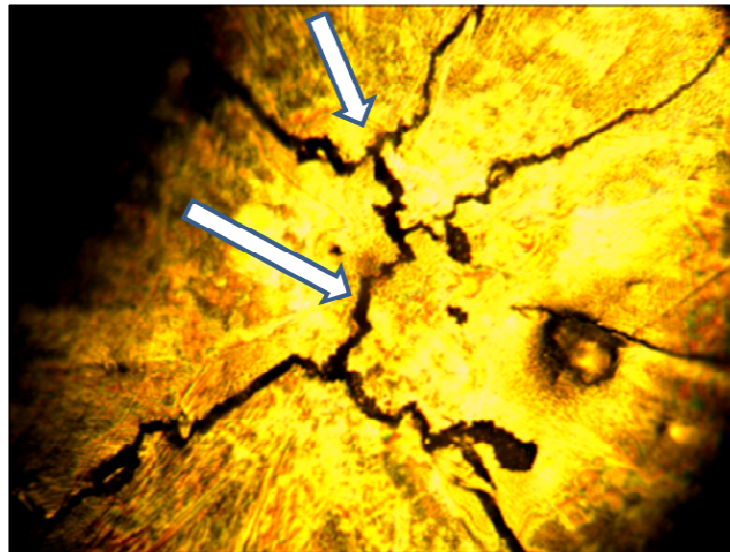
Crack on welding line of the sample from Grand Valley Specialty Welding observed under Microscope.
